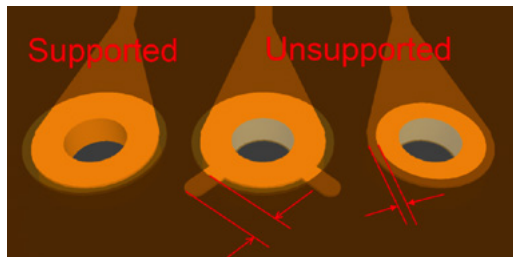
Supporting through-hole pads in flex with plating, anchoring stubs, and reduced coverlay access openings
